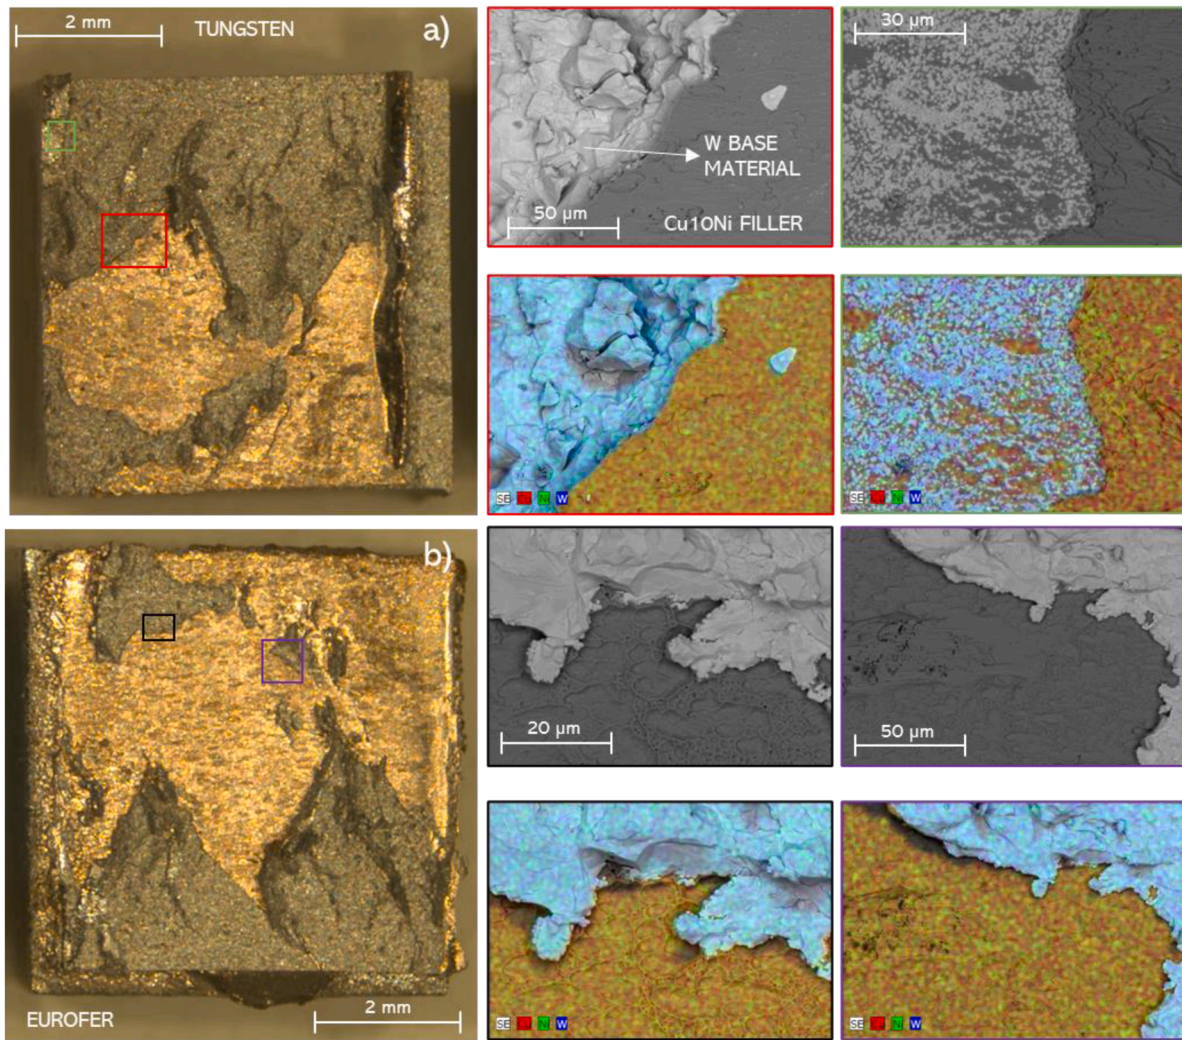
Fracture surface analysis in both a) tungsten and b) EUROFER 97 base materials from 1165 °C conditions.
